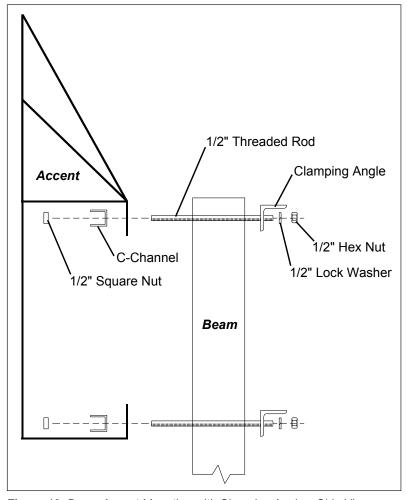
Dome Accent Mounting with Clamping Angles, Side View
